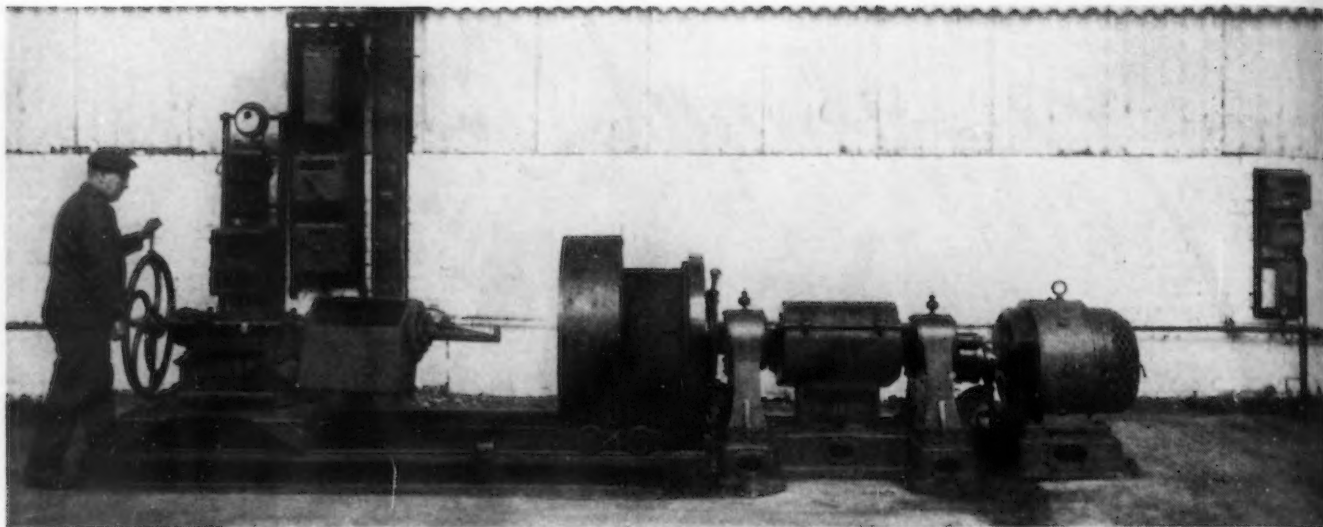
Centrifugal casting machine at Sheepbridge Stokes Centrifugal Castings Co., Ltd.
